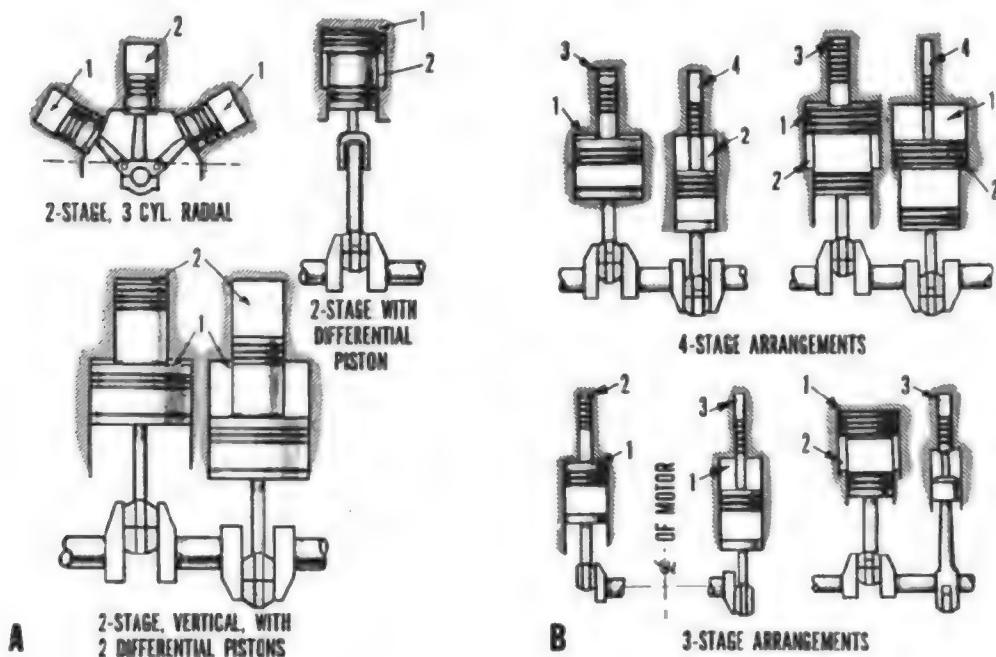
Air compressor cylinder arrangements. A. Low and medium pressure cylinders.
